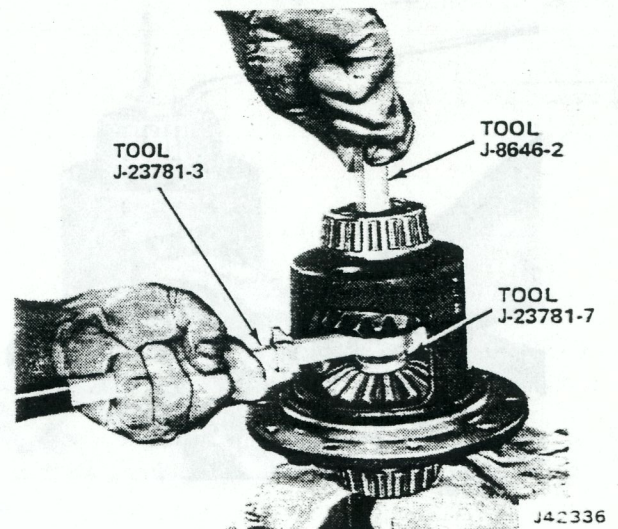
F-73 Threading Forcing Screw into Rotating Tool
